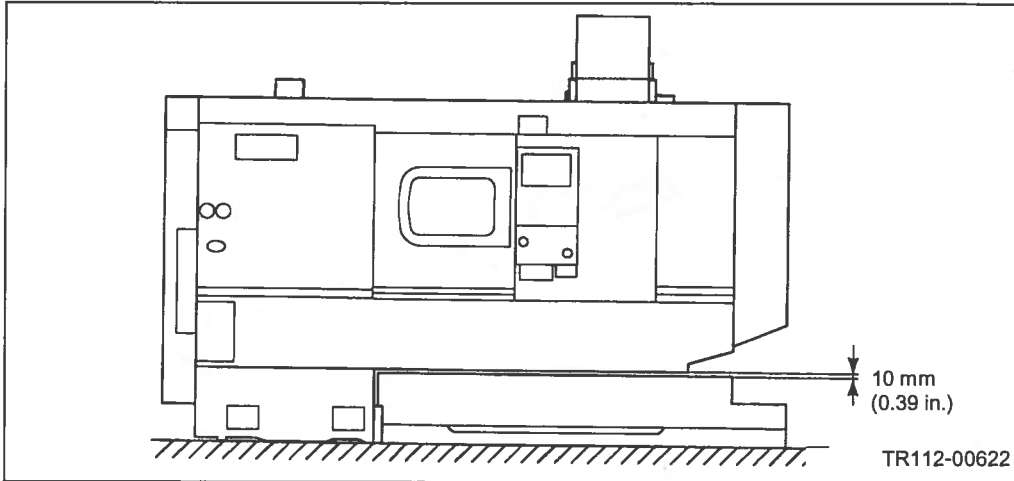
Adjusting the clearance between the body of the machine and the coolant tank
